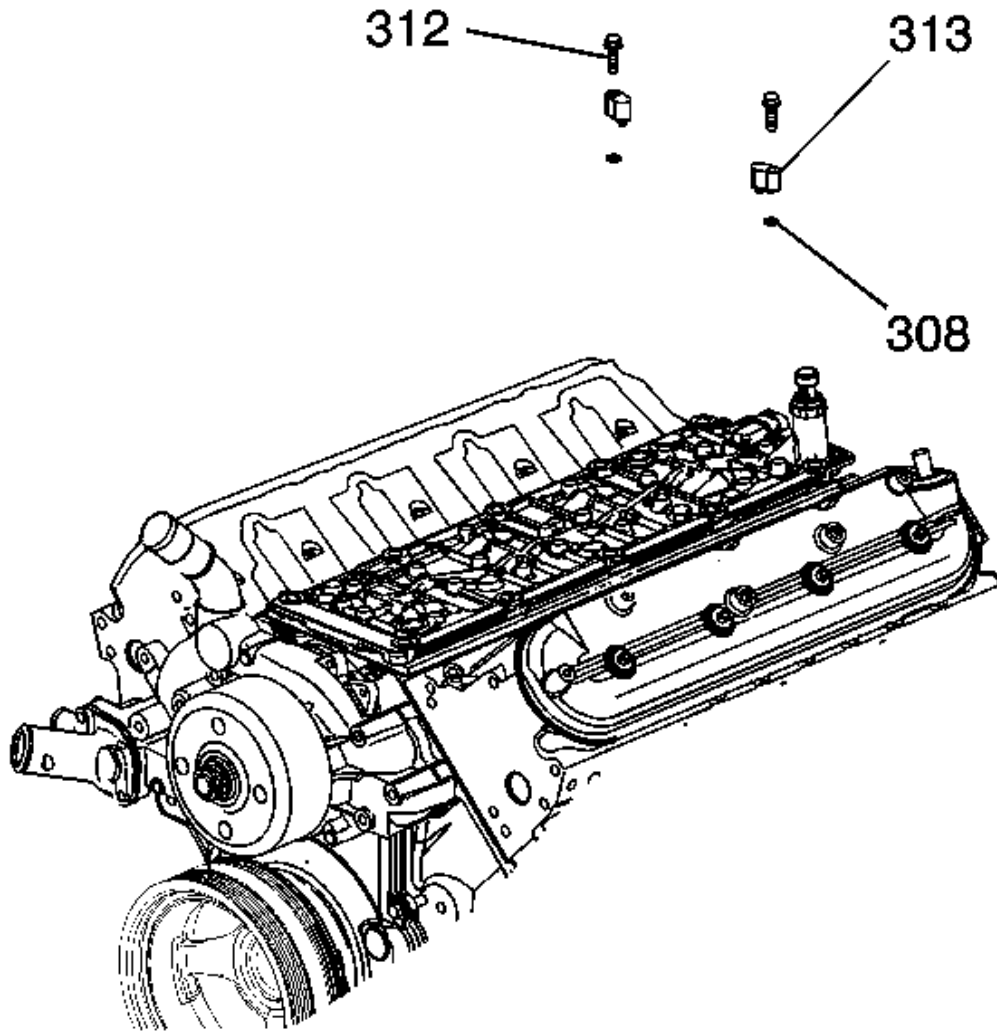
Engine Coolant Air Bleed Pipe
